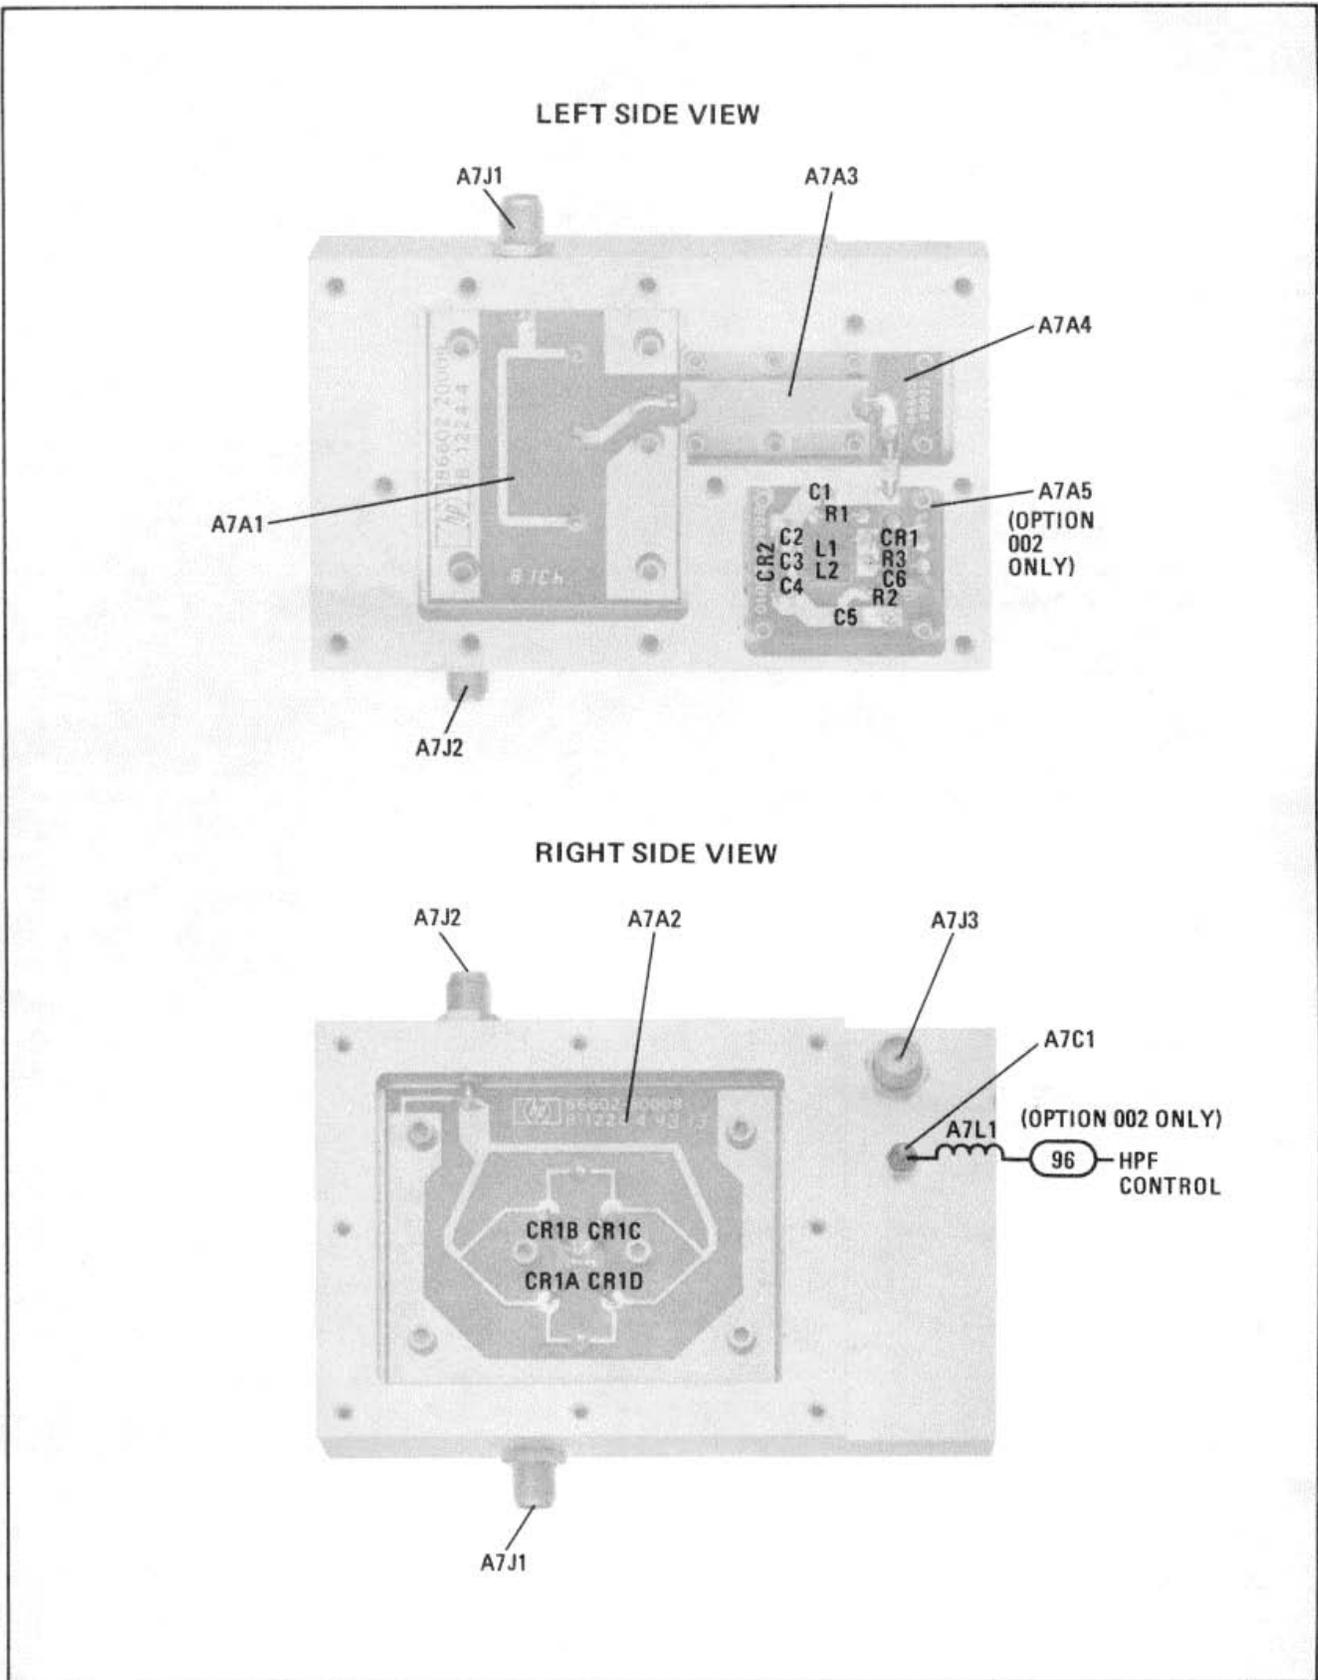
A7 Mixer Assembly's subAssembly and Component Locations
